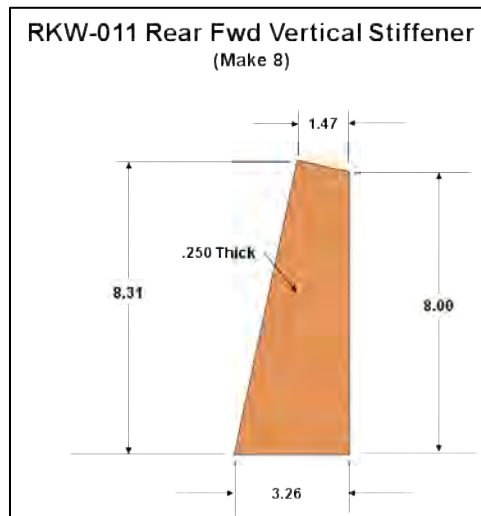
Fixture rear forward vertical stiffener – drawing
